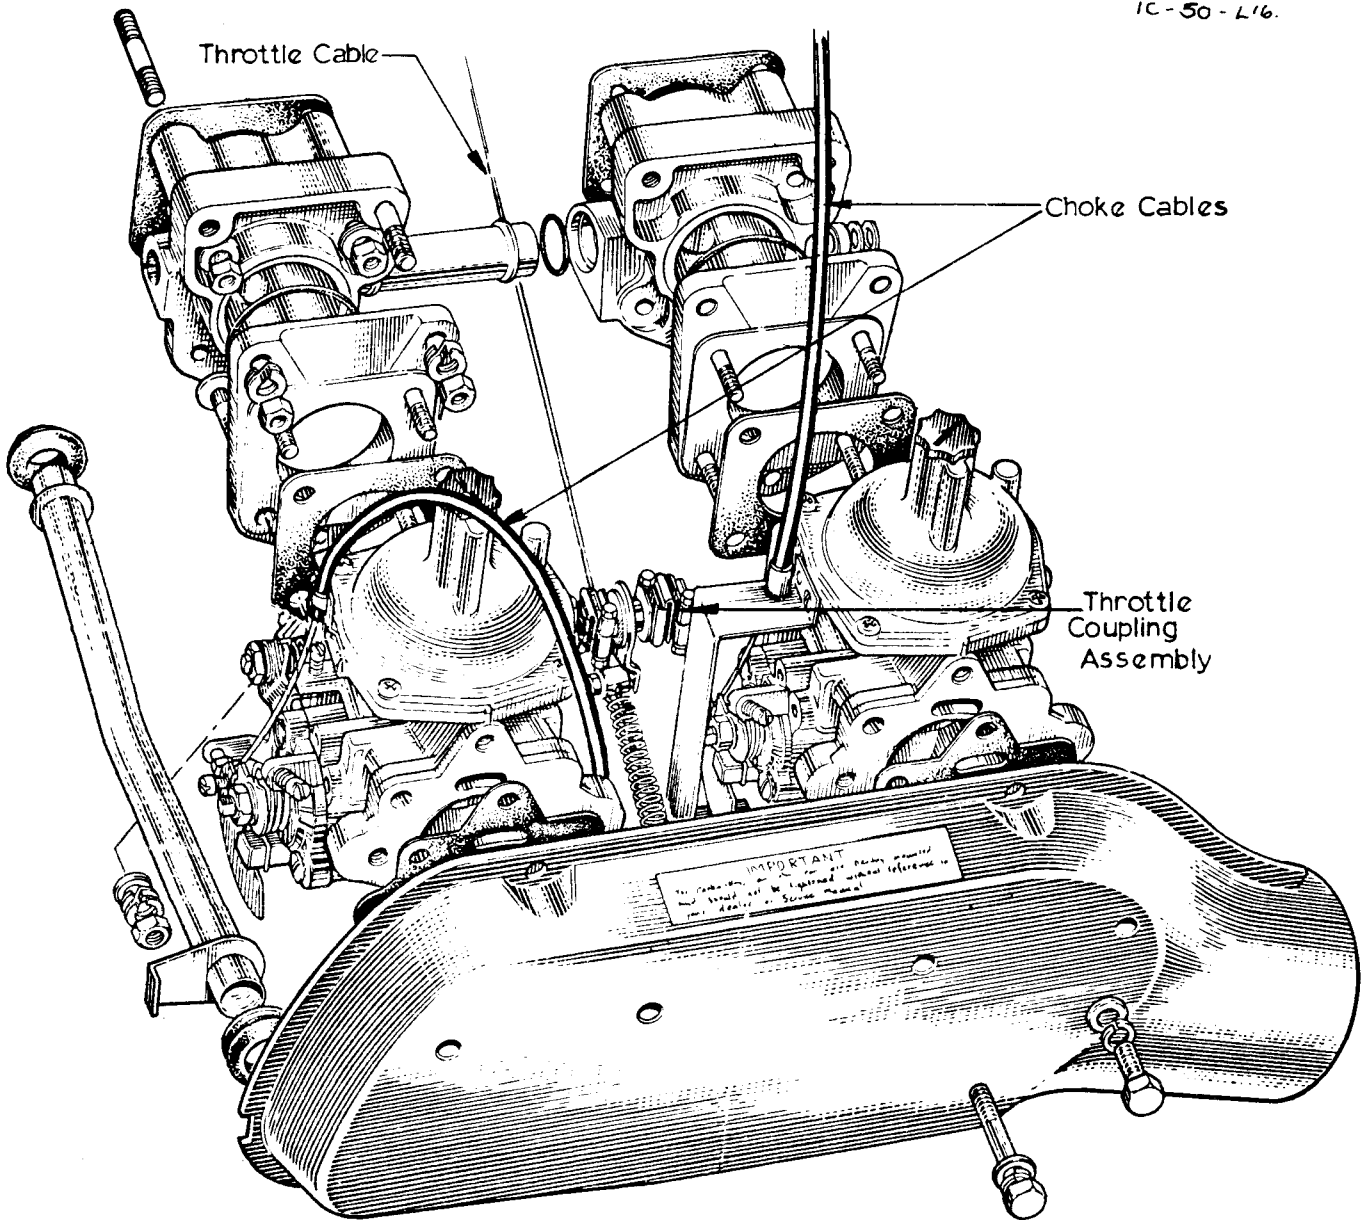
AIR BOX & CARBURETTER ASSEMBLY
